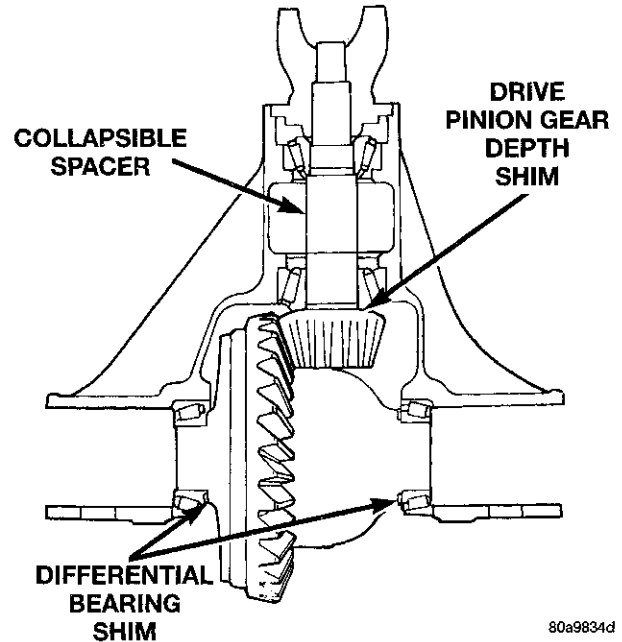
Axle Adjustment Shim Locations—248 RBI
